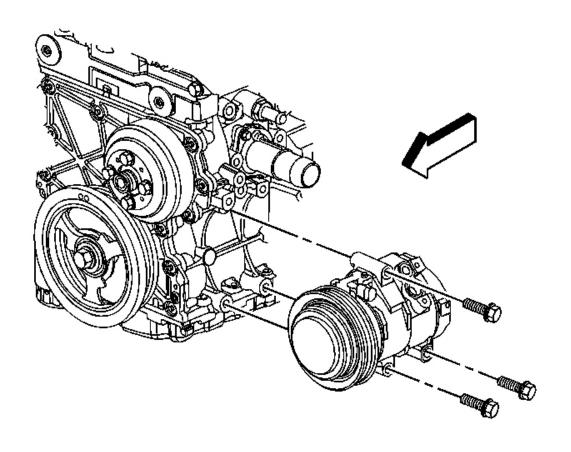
Identifying A/C Compressor & Bolts Courtesy of GENERAL MOTORS CORP.
